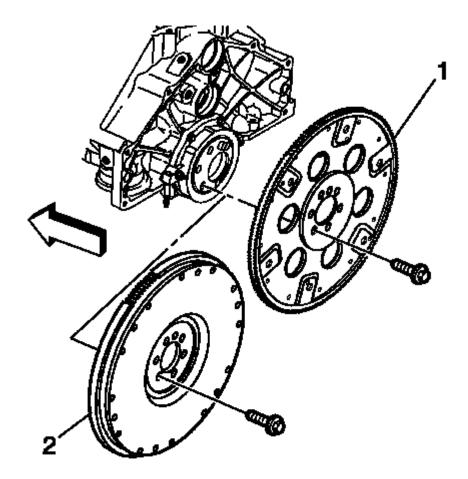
View Of Flywheels Courtesy of GENERAL MOTORS CORP.
